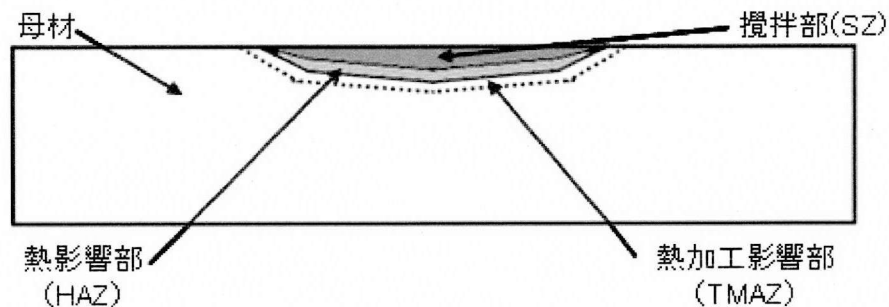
Schematic illustration of cross-section formed by a flat tool.
